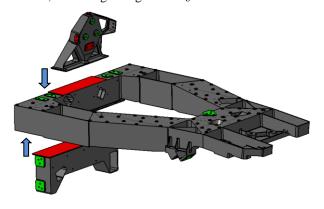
The main structure is the brazed assembly of 3 monolithic SiC parts
